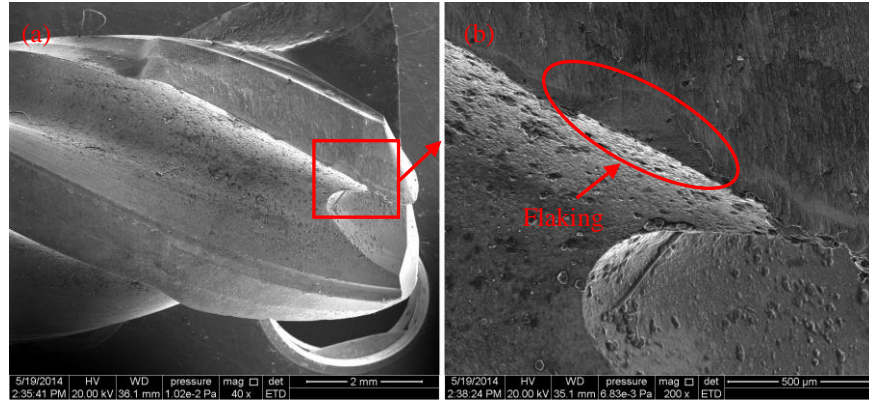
SEM images of the periphery edge of a failed helical milling cutter
